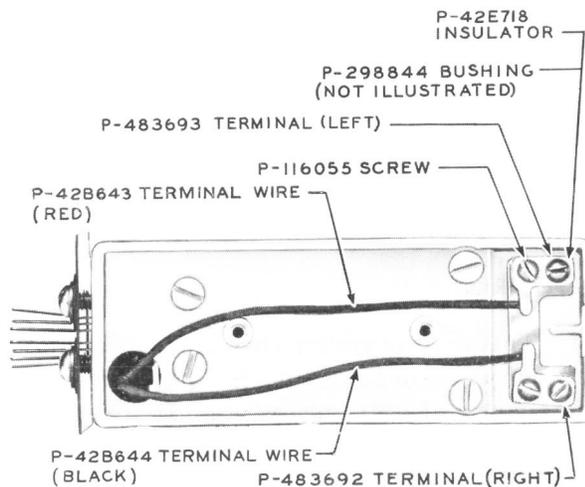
280-Type Relay - Bottom View With Shell and Cover Cap Removed
